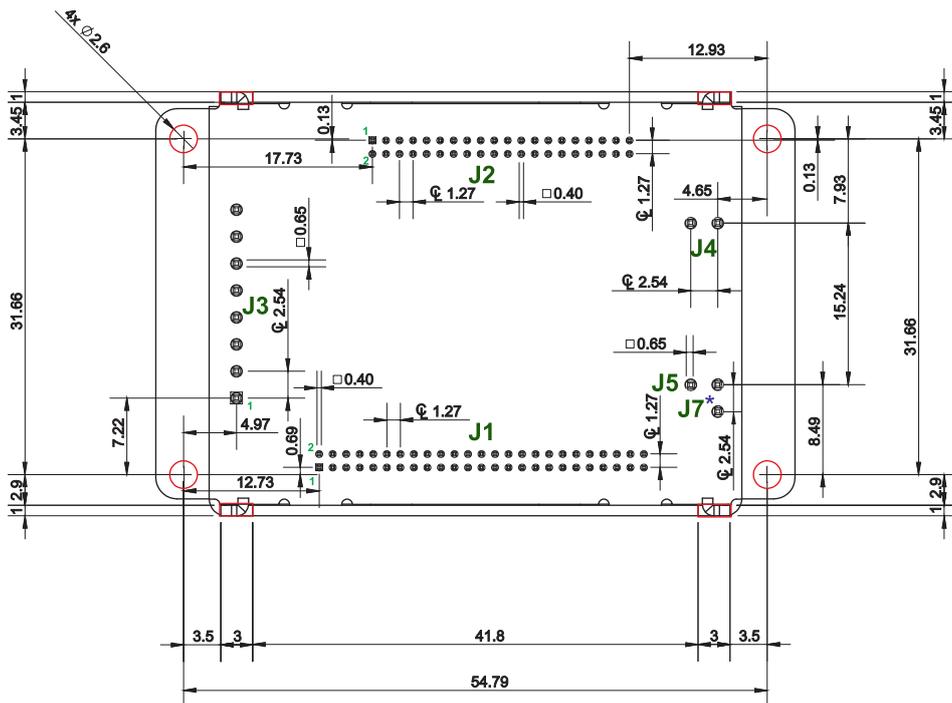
iMOTIONCUBE CAN PCB Footprint
